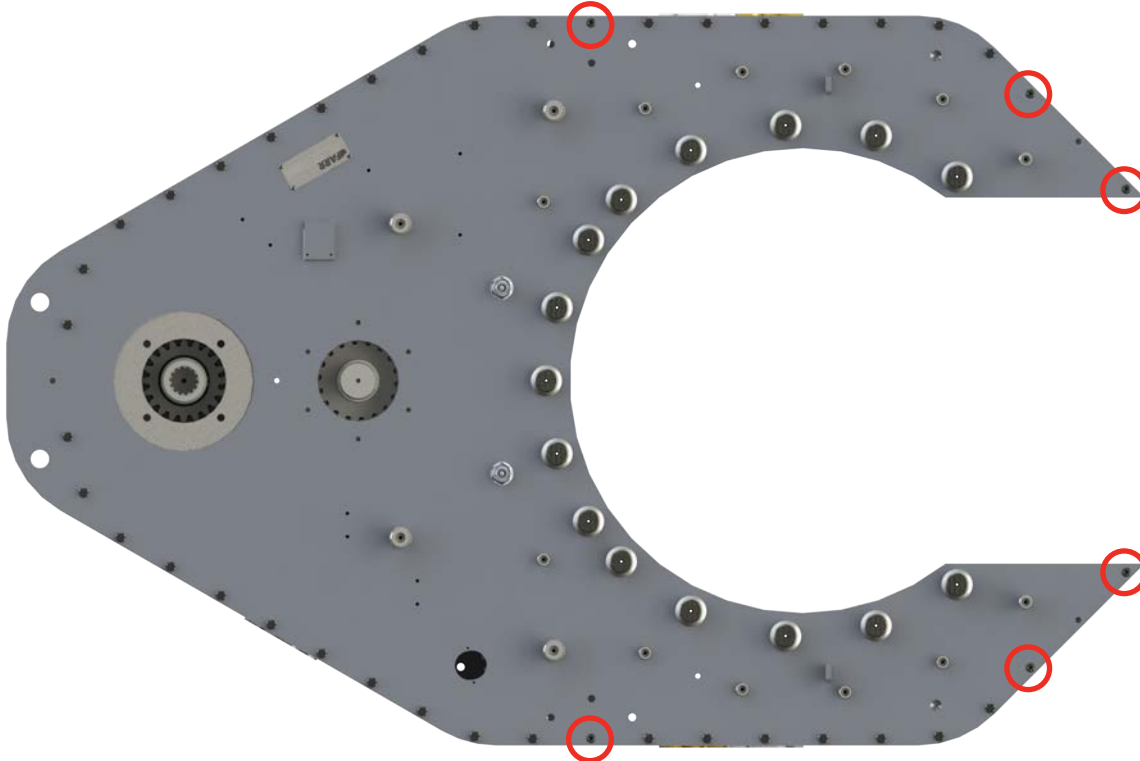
Initial Support Roller & Rotary Gear Installation
